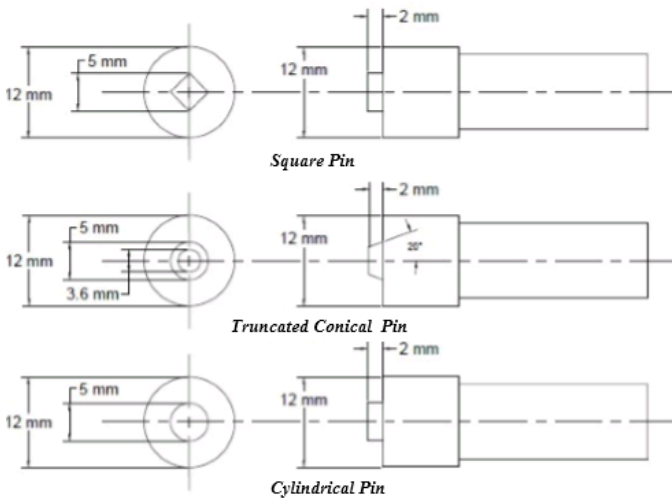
Friction stir welding tool dimension (mm).
